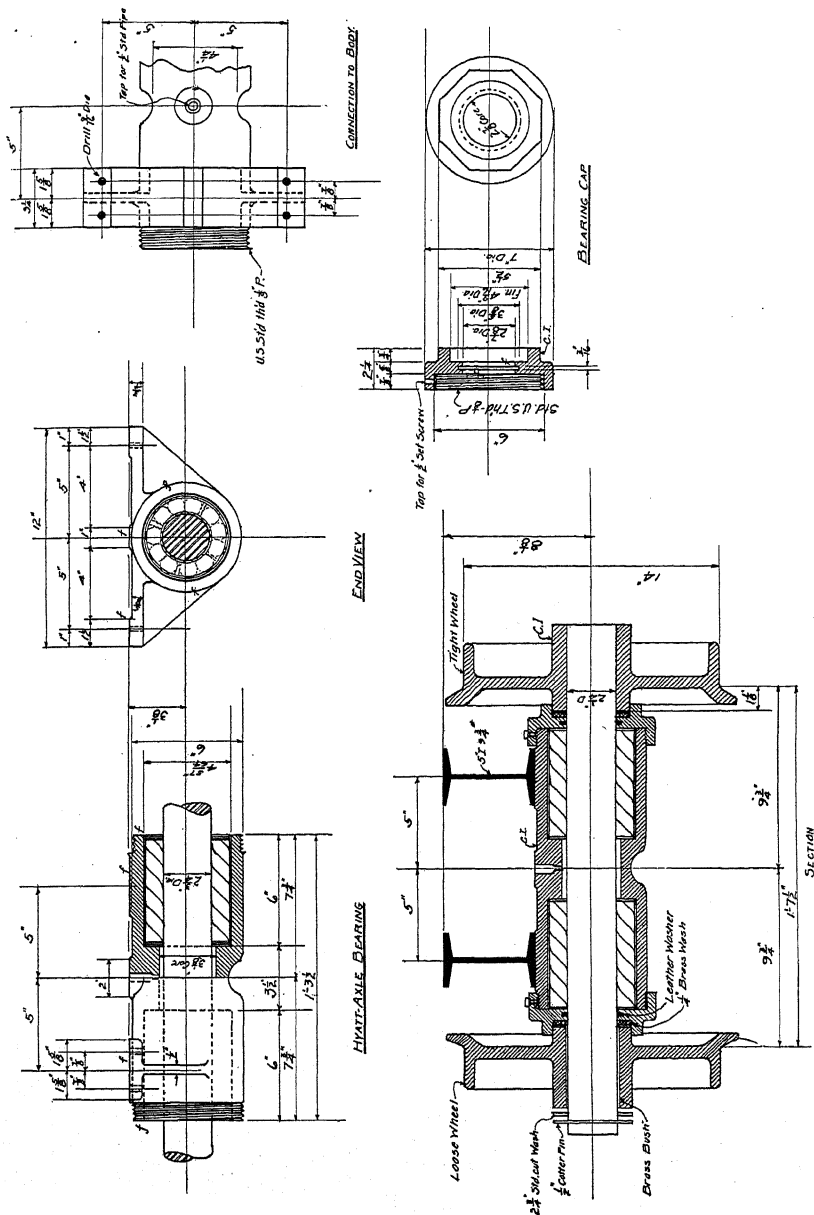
AXLE BEARING FOR 33 CU. FT. CAR.
